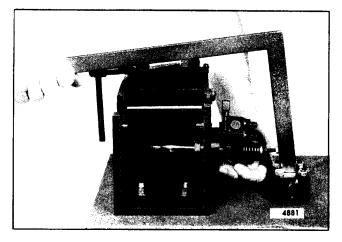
Checking Rack and Plunger For Free Movement using Tool J 22396
